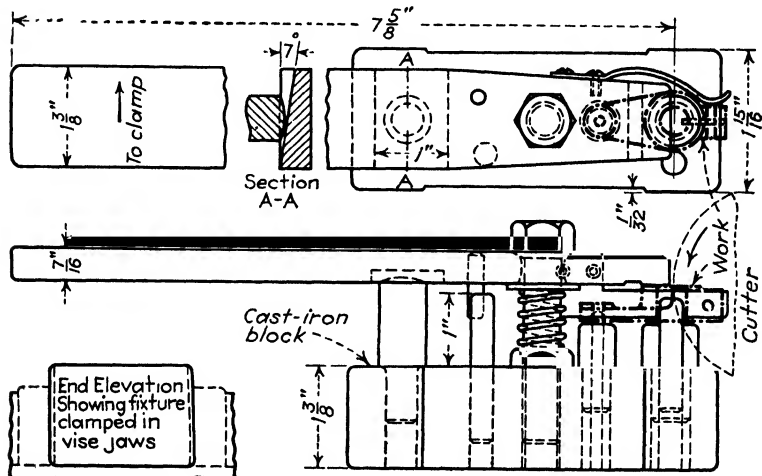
Milling fixture with a quick-acting clamp. It is held in a standard vise.
